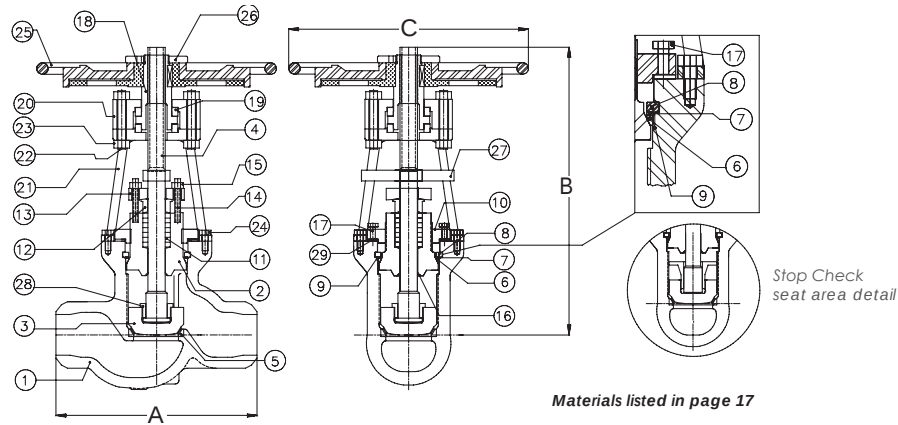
B Globe, Butt Weld Ends
